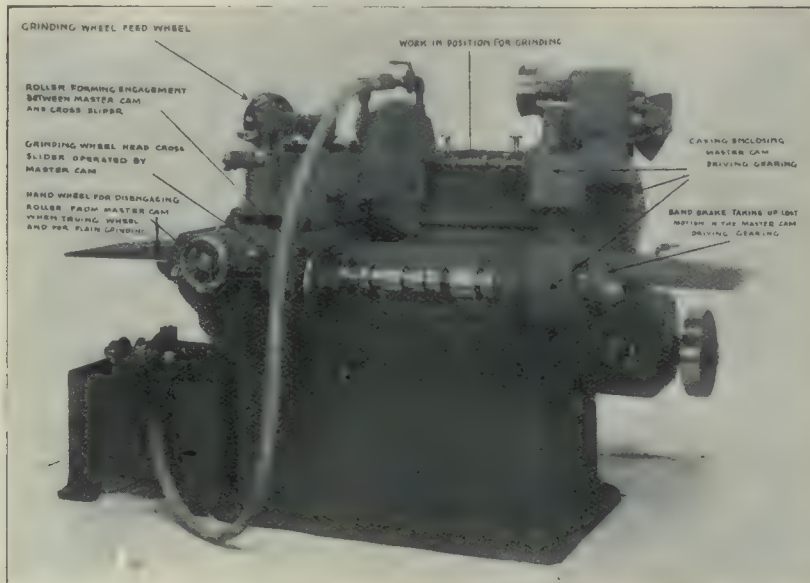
Special Landis Cylindrical Grinder Arranged for Grinding Cams Integral With the Shaft
